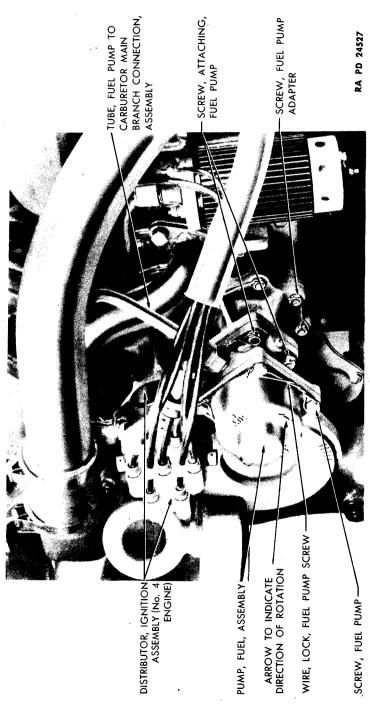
Fuel Pump Mounted On No. 4 Engine, Single Water Pump Type Power Unit
